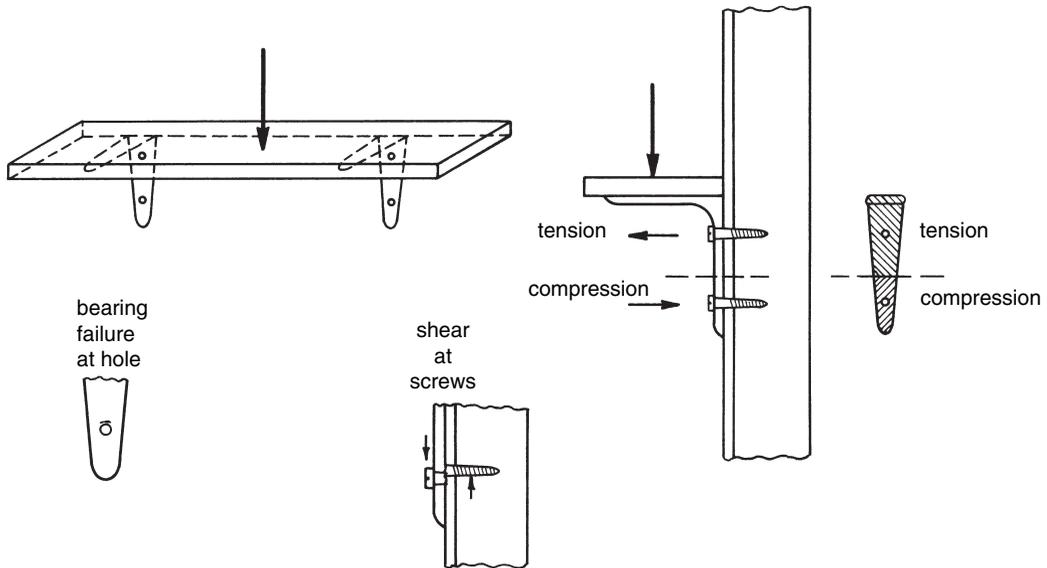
A shelf supported by brackets attached to a wall, the load distribution on the brackets, and some modes of failure.
